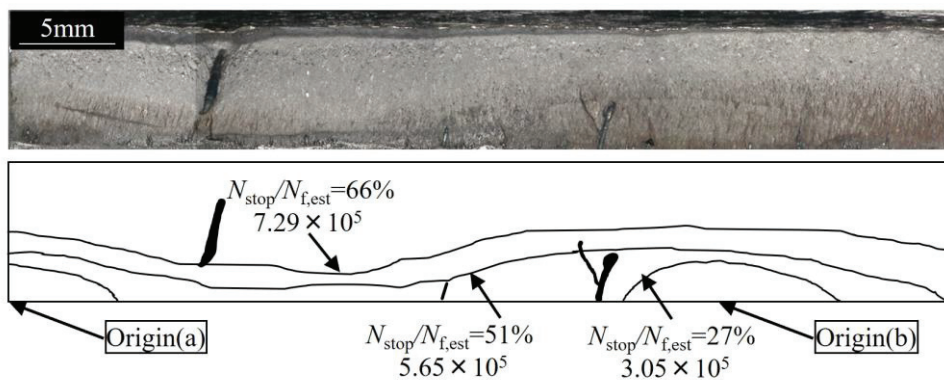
Beach mark on fracture surface of  $F_a=6$  kN
